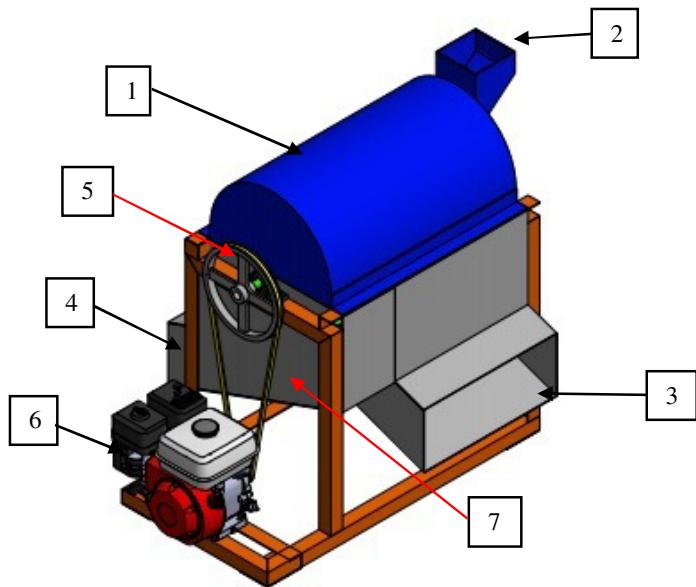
Isometric design of coconut coir crusher machine. 1. cover, 2. coconut coir inlet, 3. cocopeat outlet, 4. coco fiber outlet, 5. driven pulley, 6. drive engine, 7. v-belt
